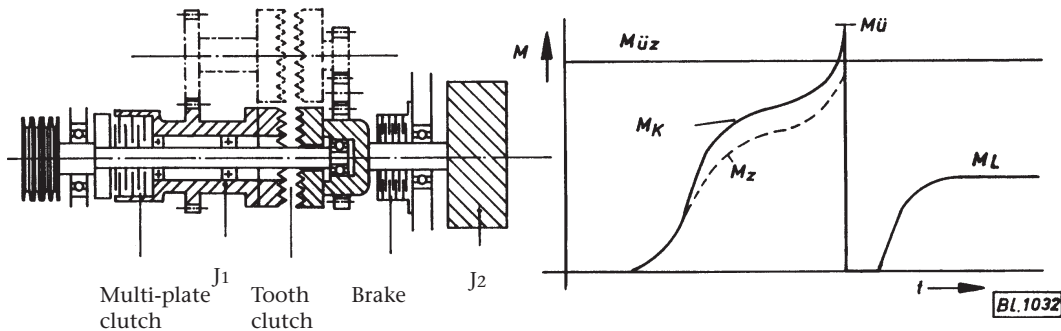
Drive layout with tooth and multi-plate clutch (Torques during engagement)
